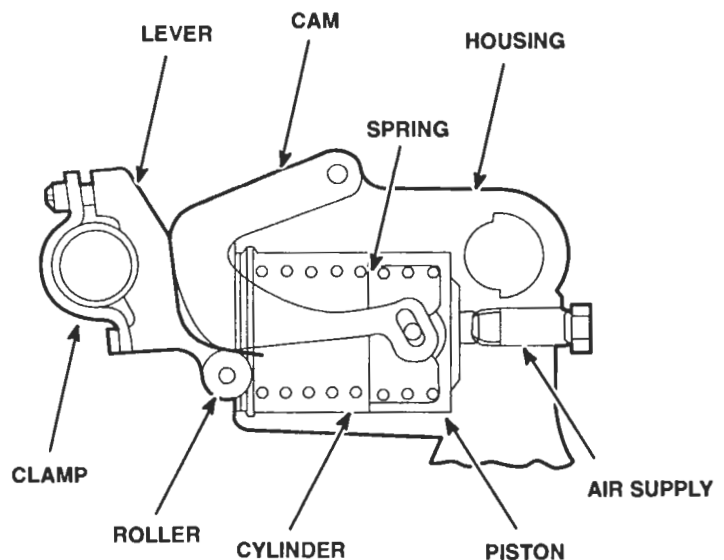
Fuel Modulator Assemble 6-71T and 6-71TT Highway Vehicle Engines
